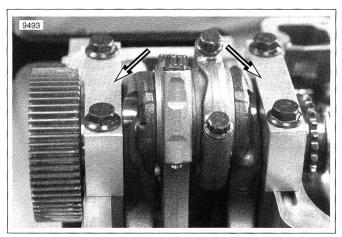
Install Crankshaft Assembly Retainers (HD-45316)
